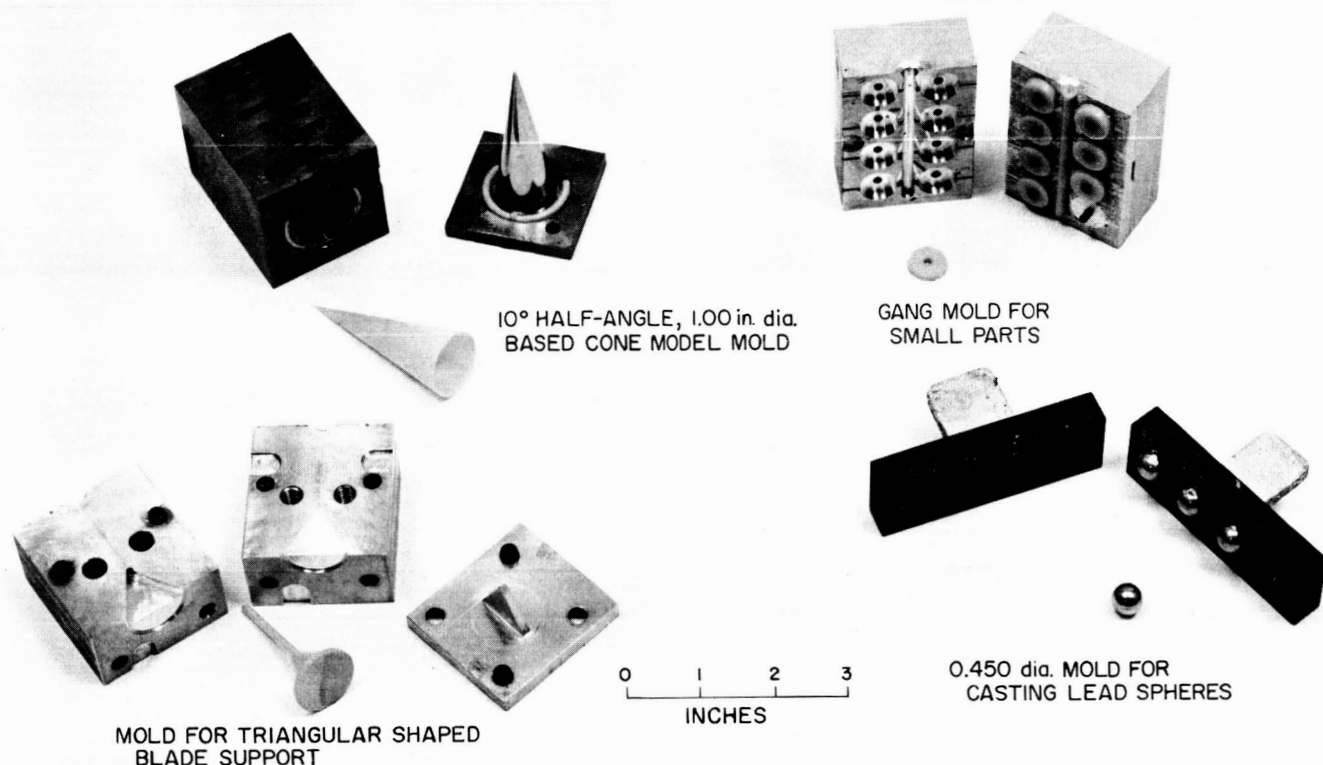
Model mold of 10-deg half-angle 1.00-in. base diameter cone
